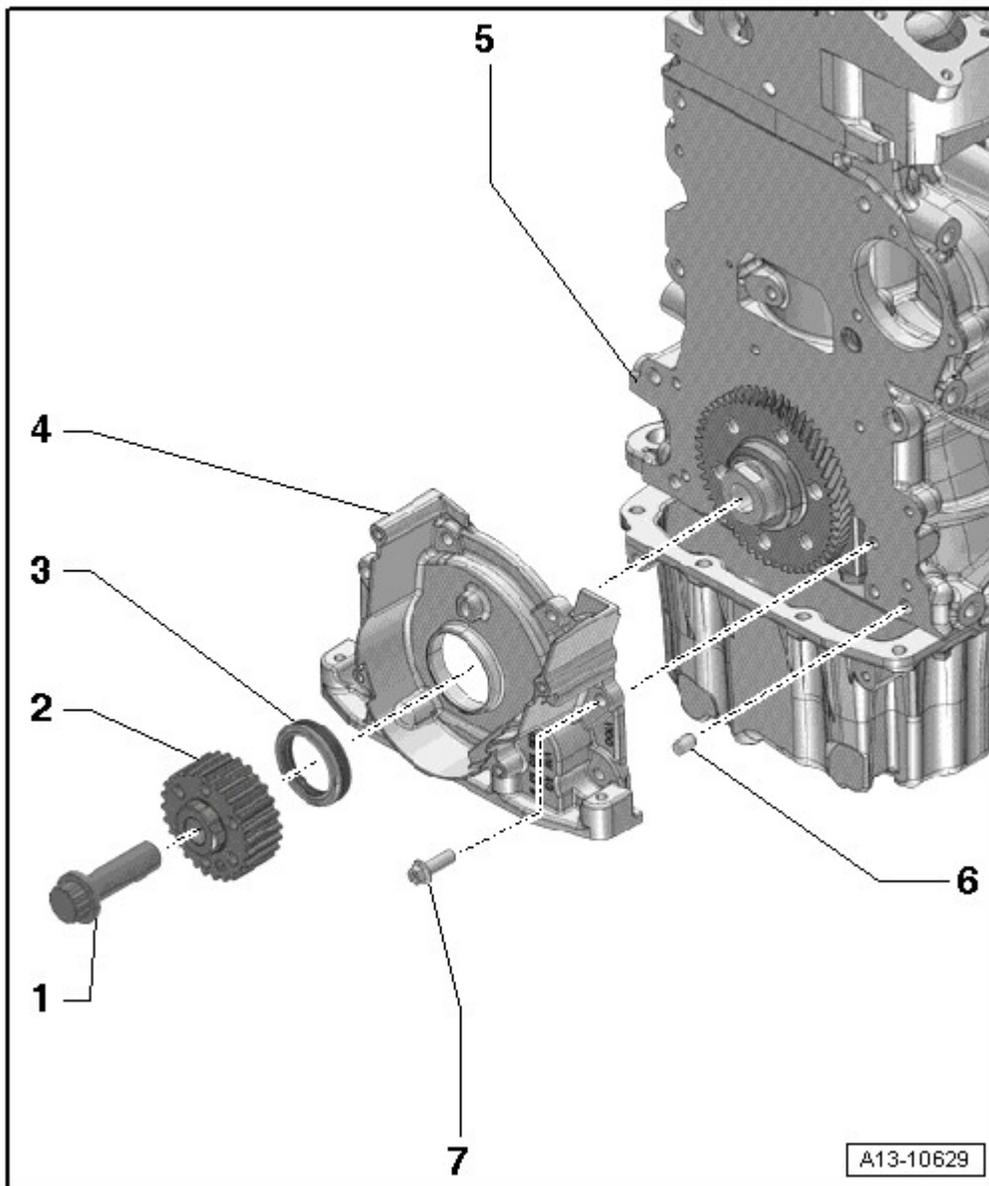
Sealing Flange, Ribbed Belt Side Assembly Overview
